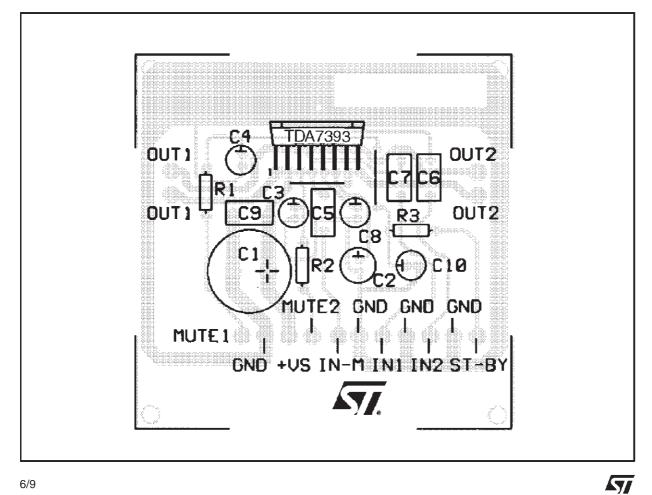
P.C. Board and Component Layout of the fig. 11 (1:1 scale)
